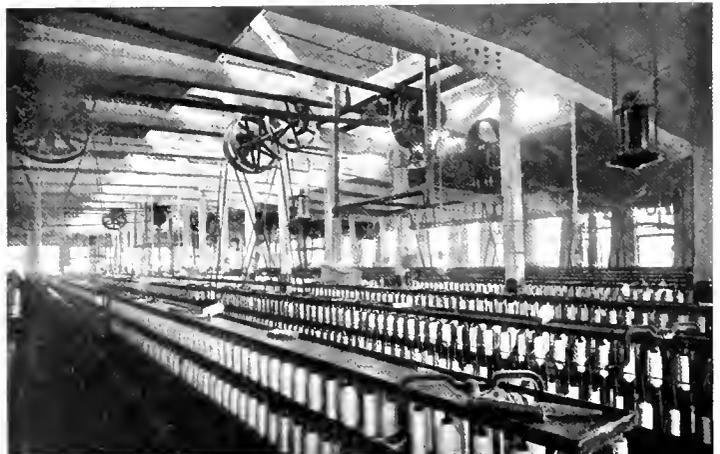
Group of Spinning Frames in Cabarrus Mill, Driven by Motor Located Overhead
